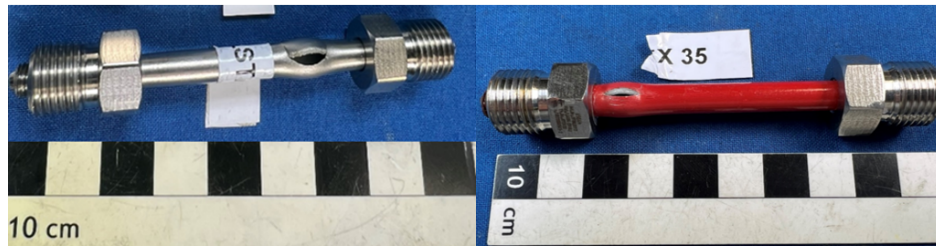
Test components after the hydraulic burst pressure test, 316L stainless steel (left) and BHM1-tube (right), each with tube fittings on both ends
